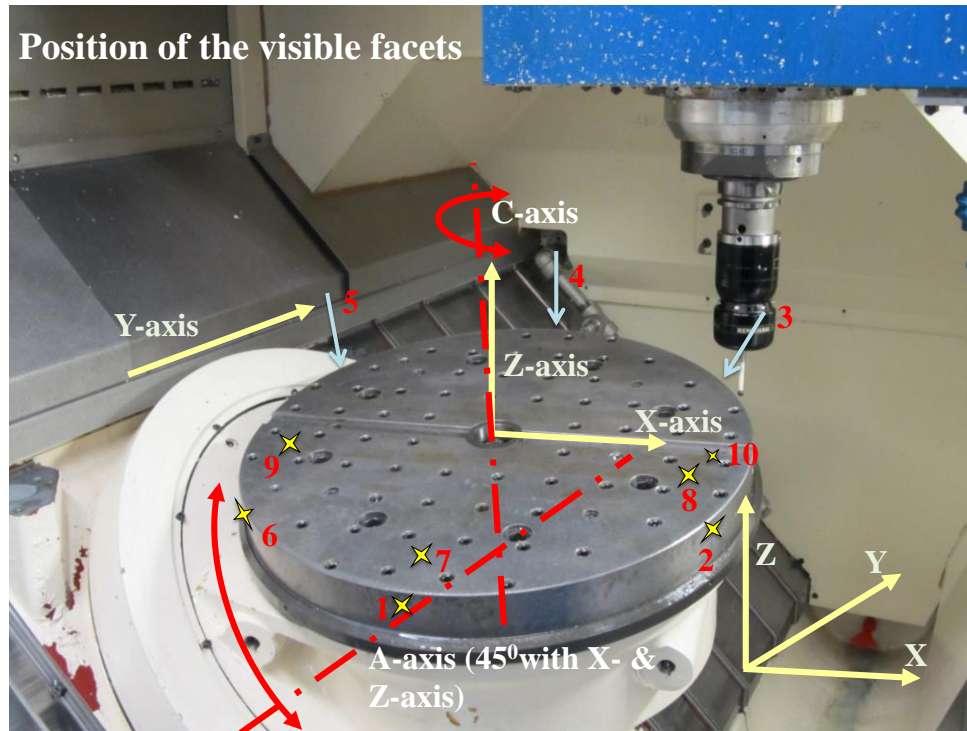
Indigenous artefact probing on the wCAYbXZ(C1)t machine tool. A-axis is shown slightly rotated. Facets are shown for Strategy S1
